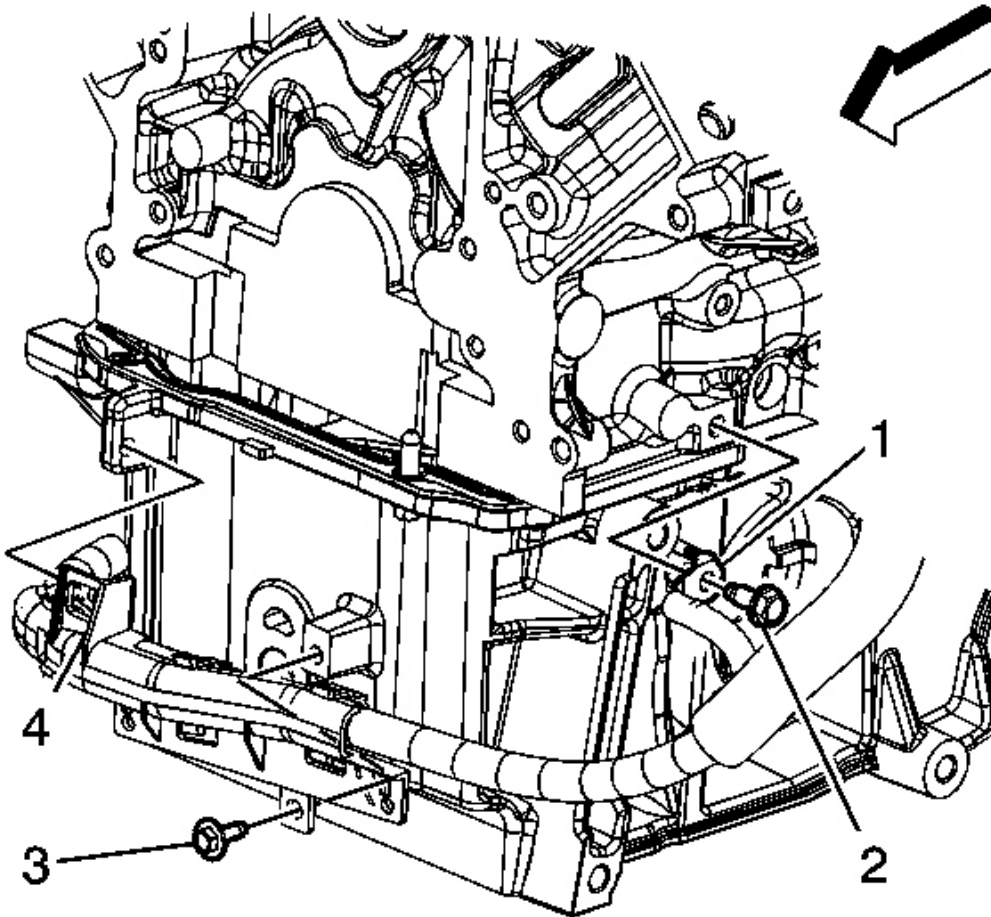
View Of Negative Battery Cable Ground Terminal At Engine Block
